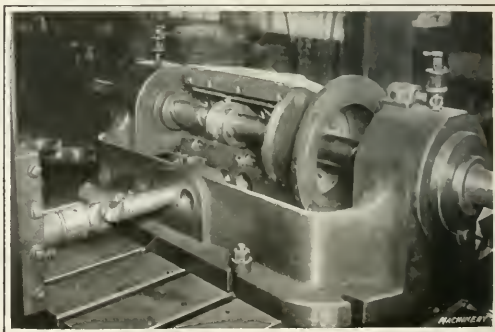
Close View of Work and Tools on Machines shown in Fig. 4
